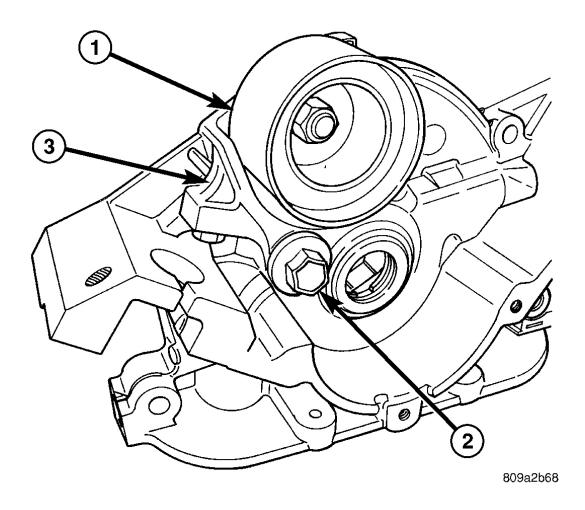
Removing/Installing Tensioner Pulley, Pivot Bolt & Tensioner Bracket Courtesy of CHRYSLER LLC
